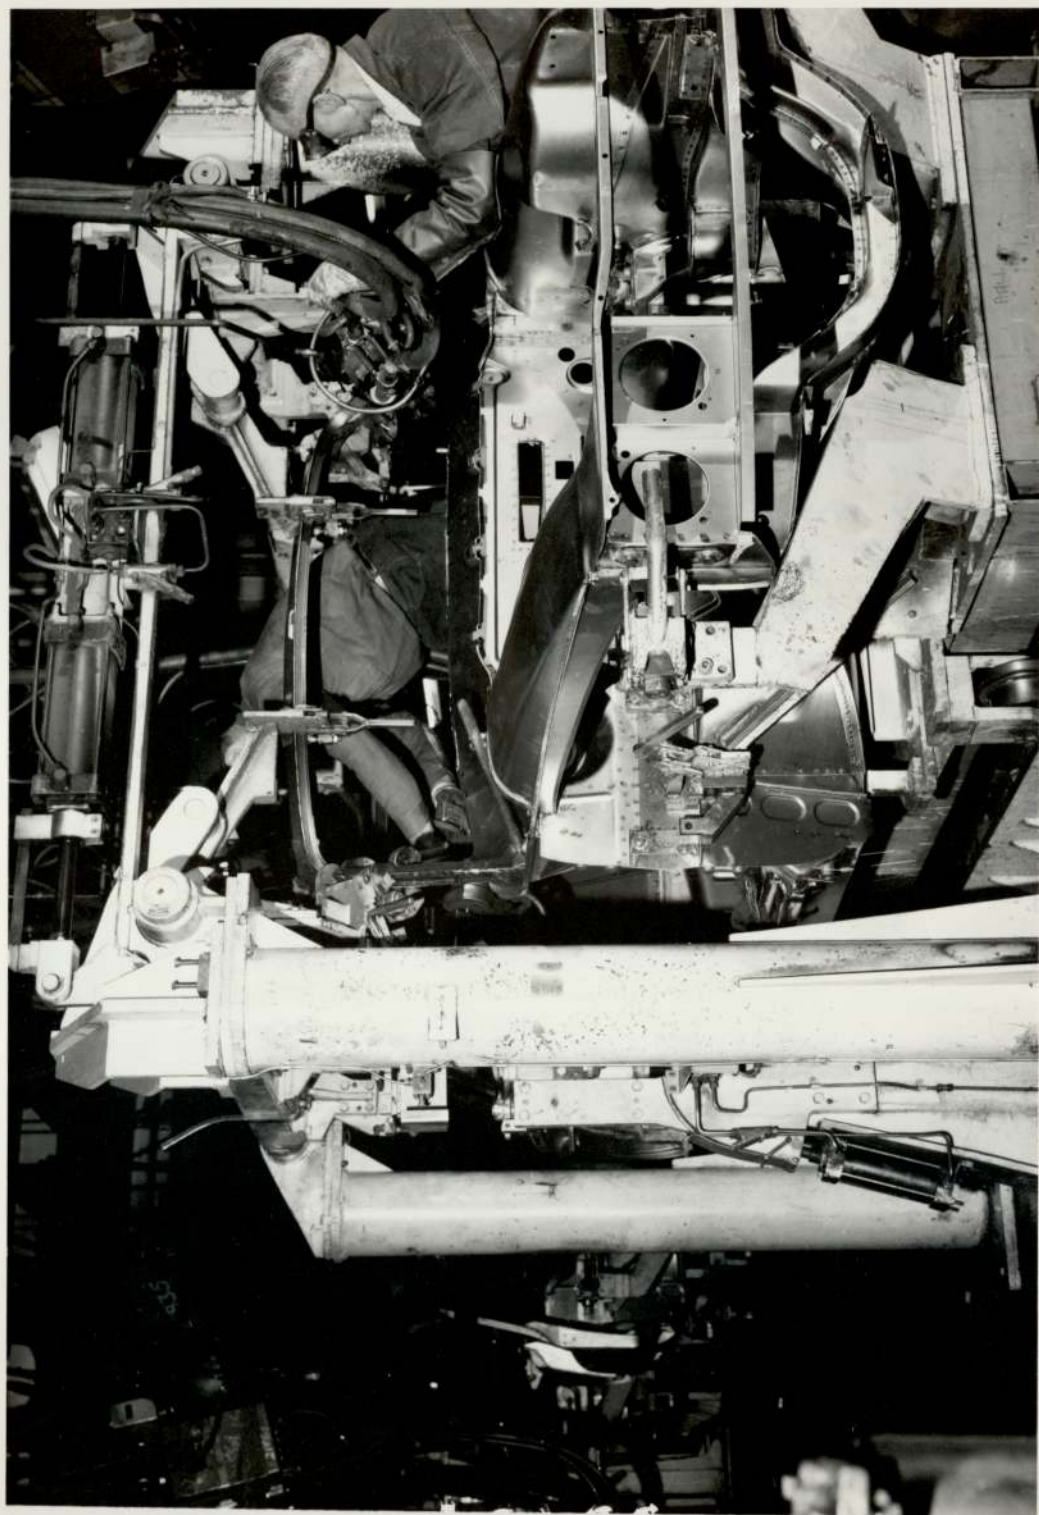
PLATE V BOX JIG - COWLEY INTERMITTENT CONVEYOR
